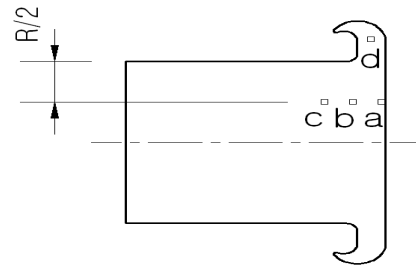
Range of Macrophotograph inspection, as-welded
